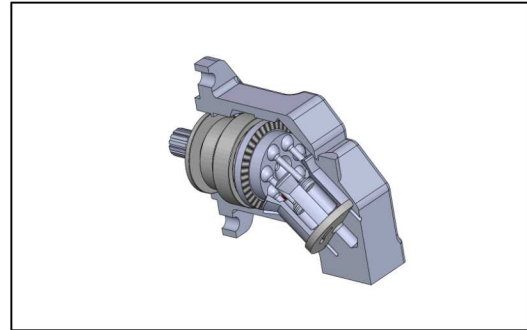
CONVENTIONAL HYDRAULIC PISTON MOTOR.
